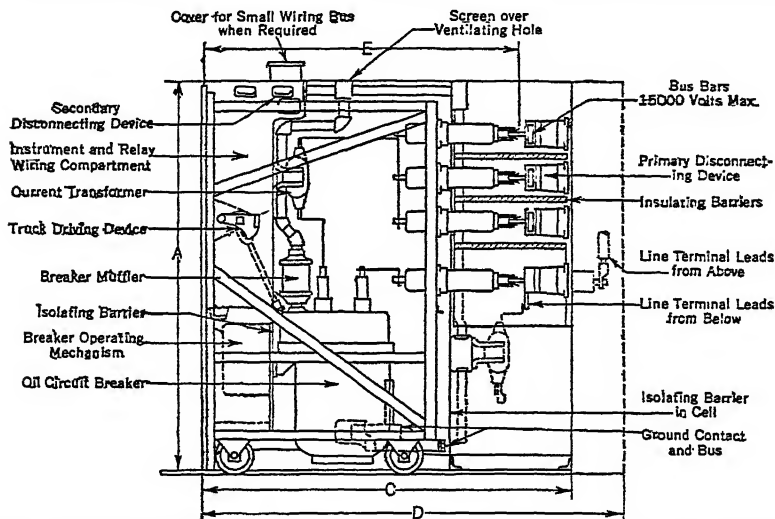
Outline Drawing of Truck-type Switchgear with Solenoid Operated Oil Circuit Breaker
